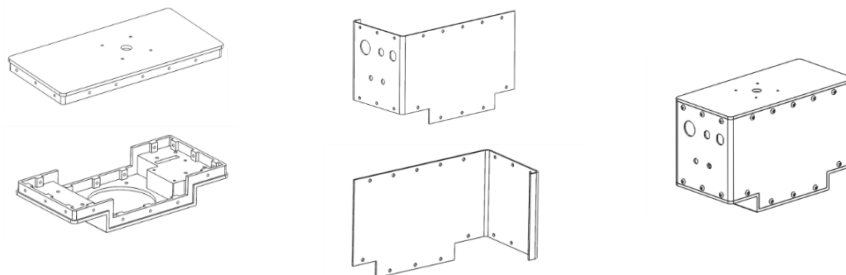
Preliminary drawings of the different casing parts. Left, up: Aluminium top. Left, down: Aluminium base. Middle: two Stainless Steel sheet metal parts. Right: casing subassembly, held together with screws.
